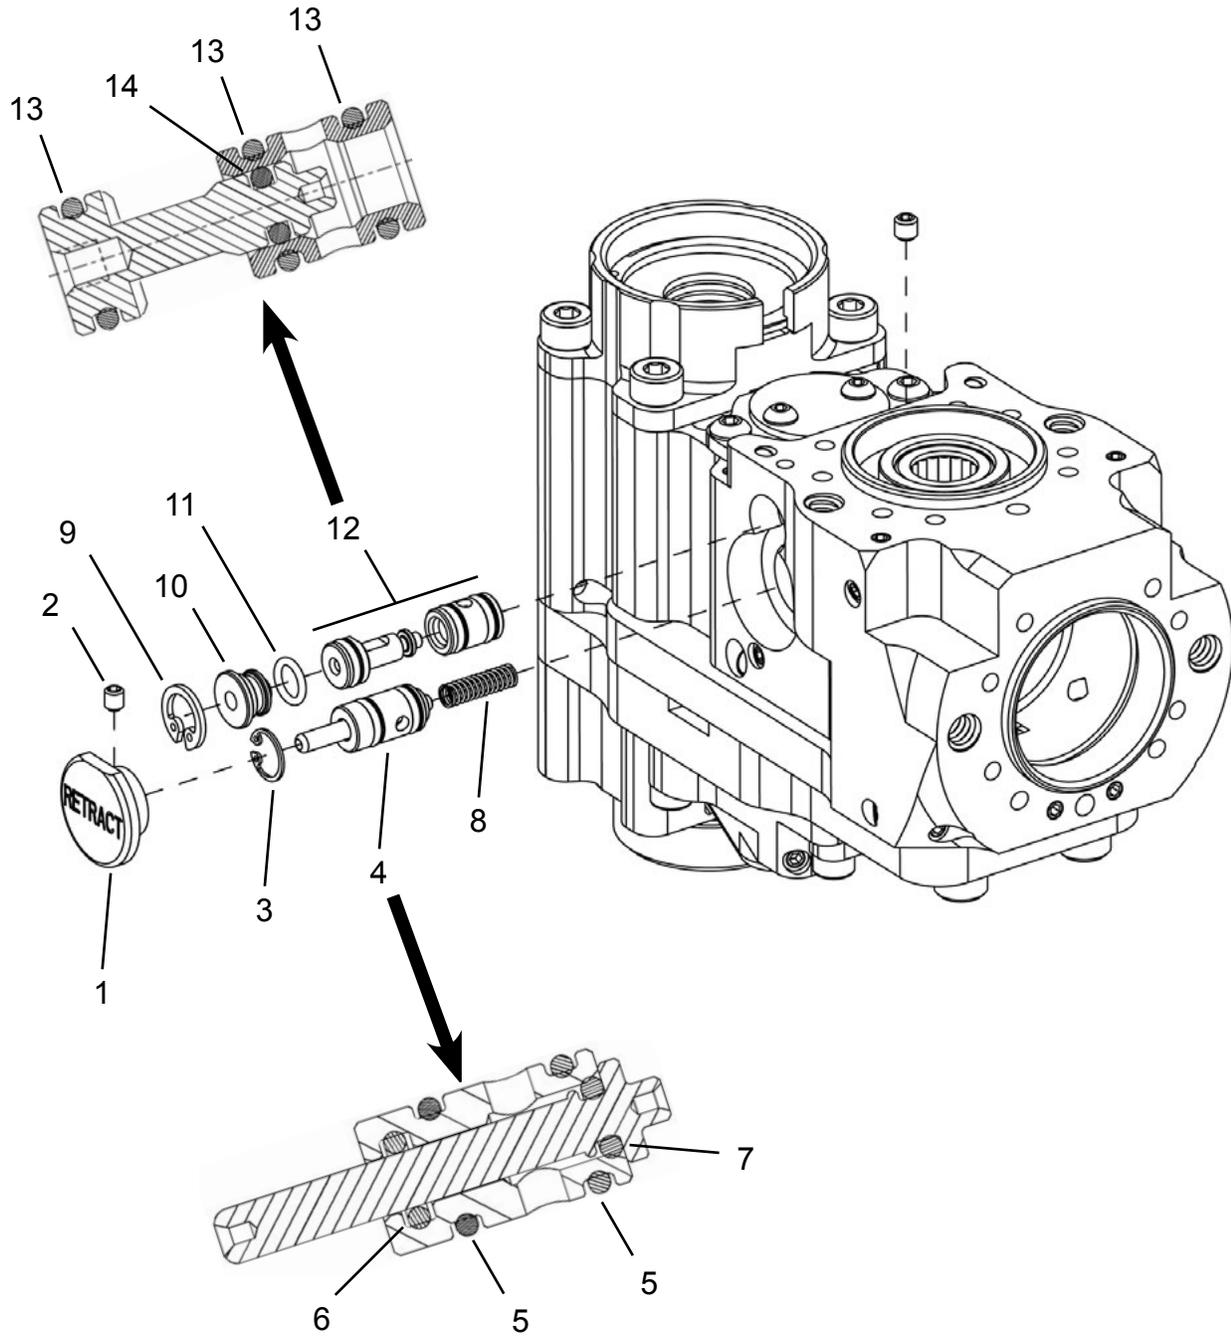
642486PT-XX Spindle Feed Gear - MITIS
